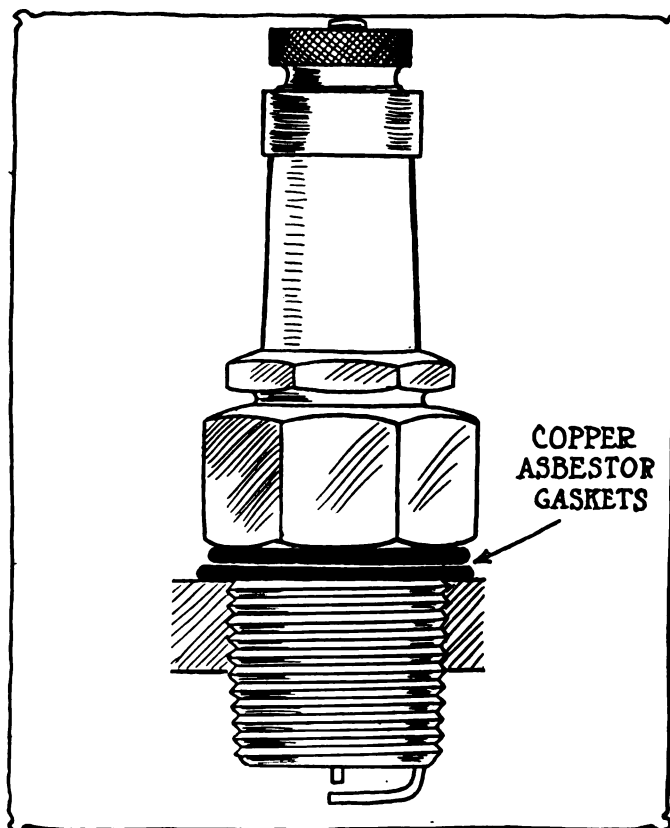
Use of two copper asbestos gaskets will prevent leaks at plug
